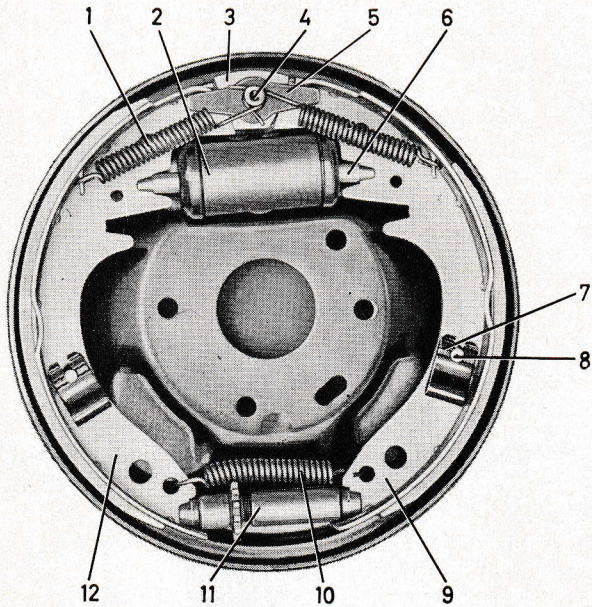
Wheel brake unit, late production, right-hand front wheel.
